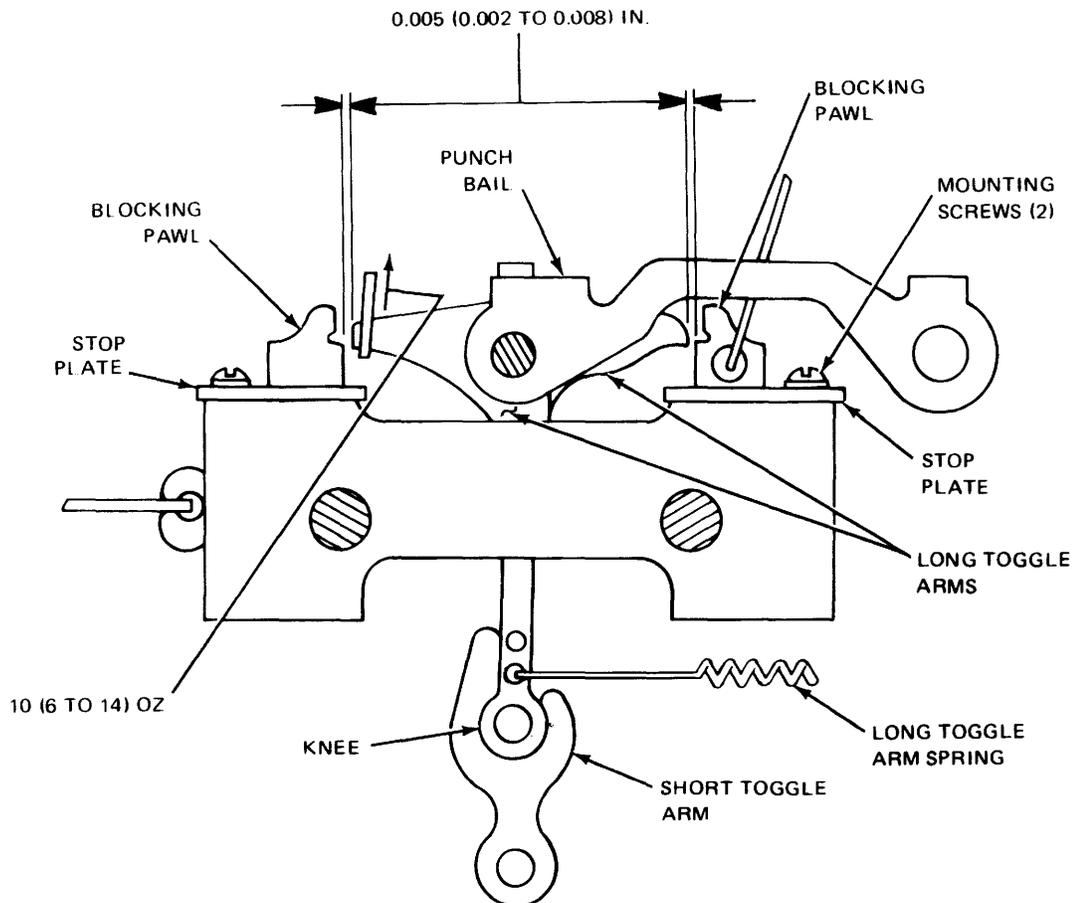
Stop Plate and Toggle Arm Springs Adjustment.
